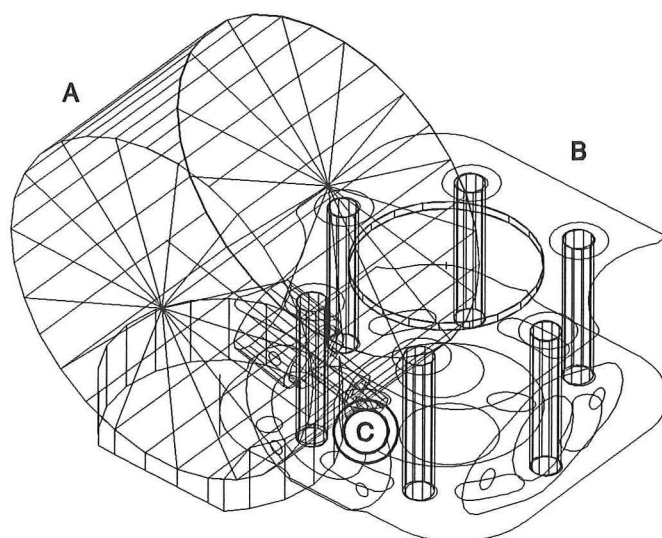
3-D wire-frame representation of cylinder head and camshaft housing
